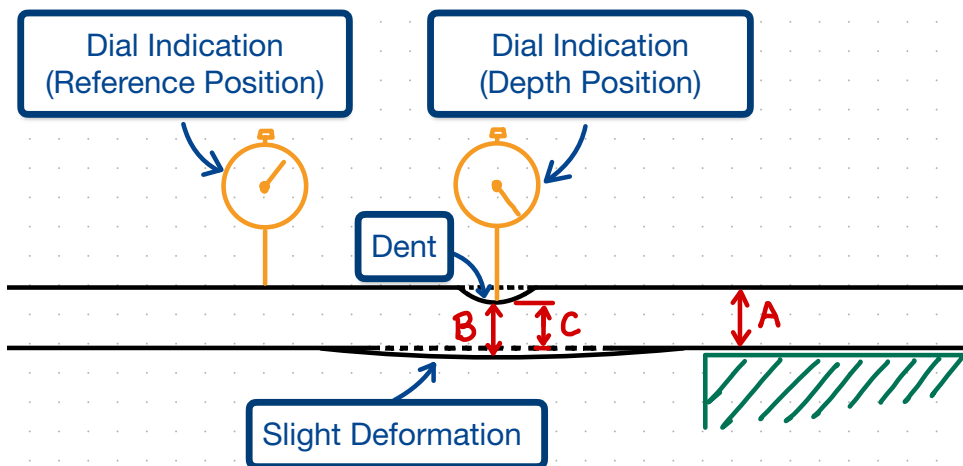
Dent measurement sketch showing the sandwich panel with a dented top facesheet and slightly deformed bottom facesheet placed onto a flat surface at a non-deformed section to provide a consistent panel placement. The panel is of thickness A . If the panel were to be placed entirely onto the flat surface, the top facesheet at the dent would be raised by distance B as opposed to the desired distance C . The dent depth is the difference between lengths A and C .
